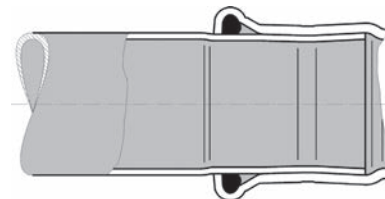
Pipe joint pressed together, dimensions up to 42mm
